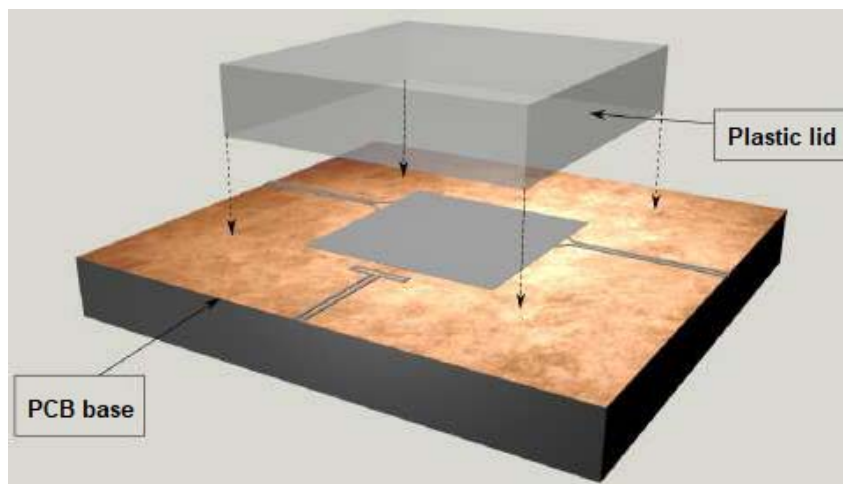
Package main pieces: single layer PCB base and plastic lid cover.
